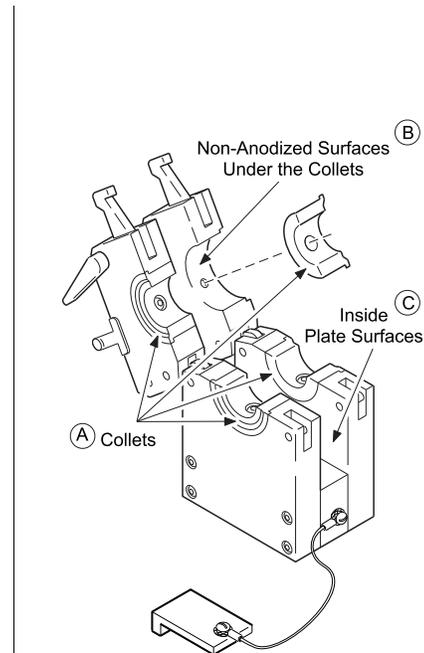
Cleaning the Collets and Collet Mounting Surfaces
